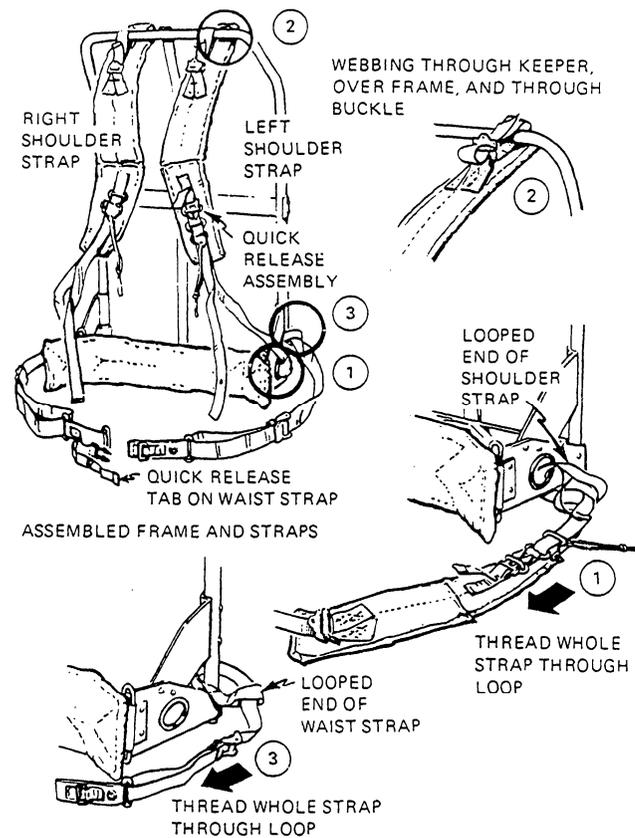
Attaching shoulder and waist straps to pack frame.
